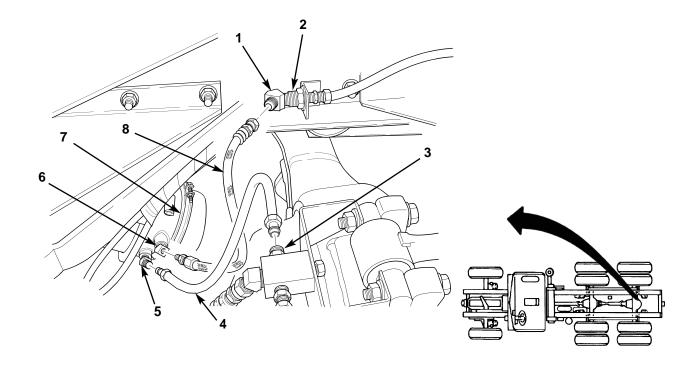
Removing Tube and Hose Assembly from Service Brake Chamber.
